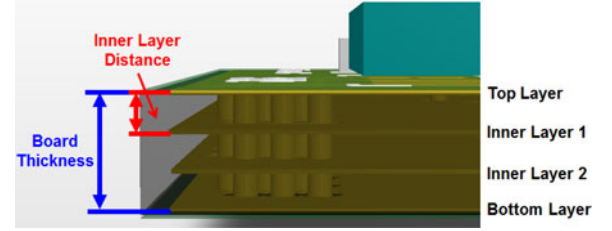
PCB cross-section drawing of board thickness and inner layer distance for experimental designs.
